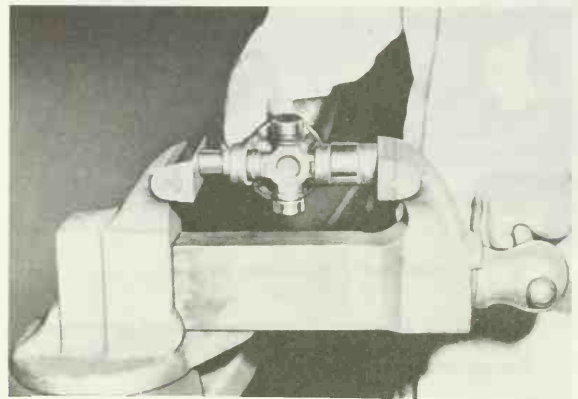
A vise may be used the press the bearing caps into the drive shaft yoke. (Chevrolet Motor Division of General Motors Corporation)
